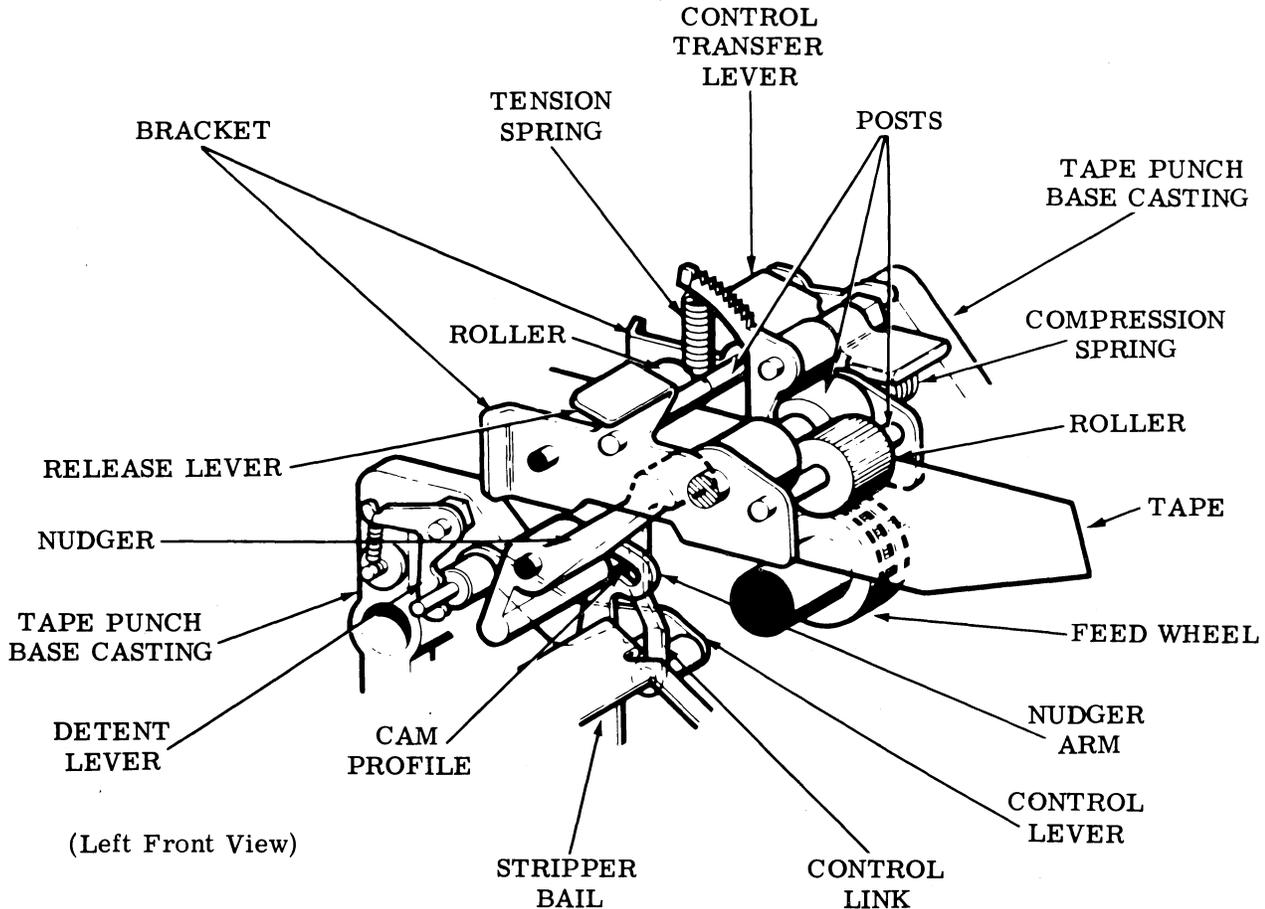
Tape Guide Assembly (Tape Feed Mechanism)
